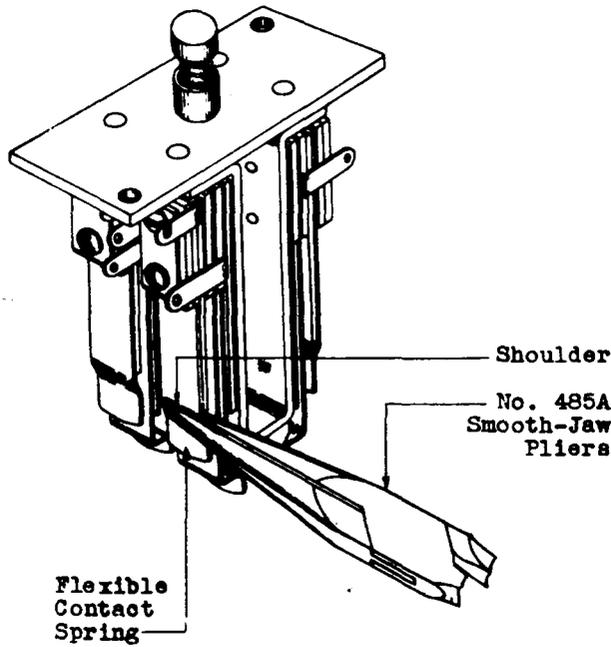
Method of Adjusting Tip of Flexible Contact Spring
